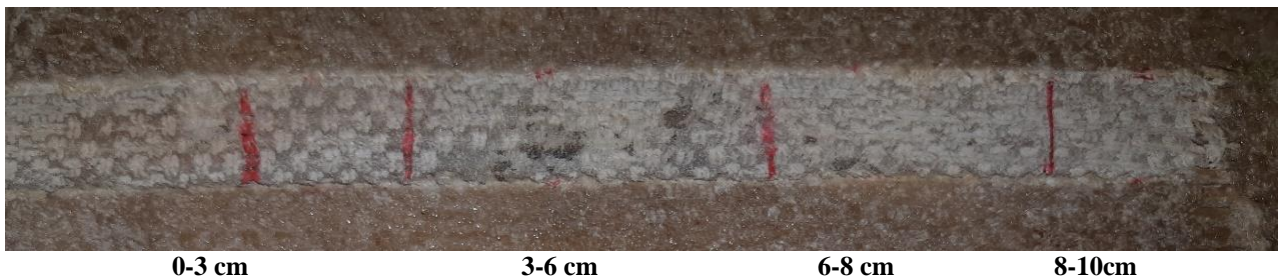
Photograph of cutting surface using spindle speed of 1300rpm and feed rate of 4 mm/min. The distance is 0-3, 3-6, 6-8, and 8-10 cm from the left end off specimens
